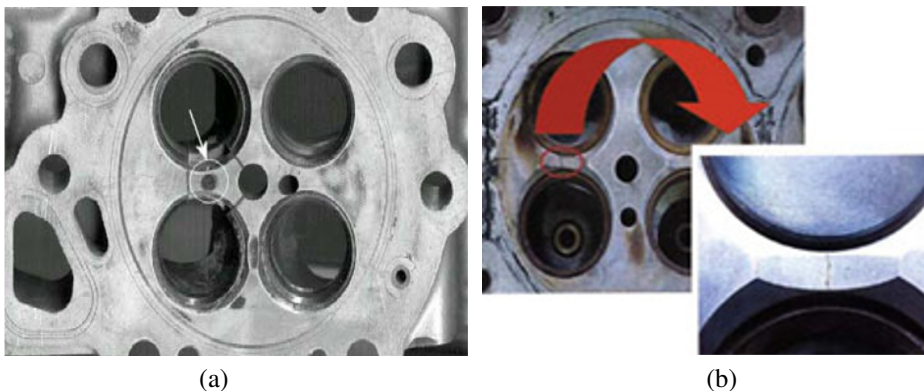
The cracked cylinder head, (a) [36], (b) [27]
